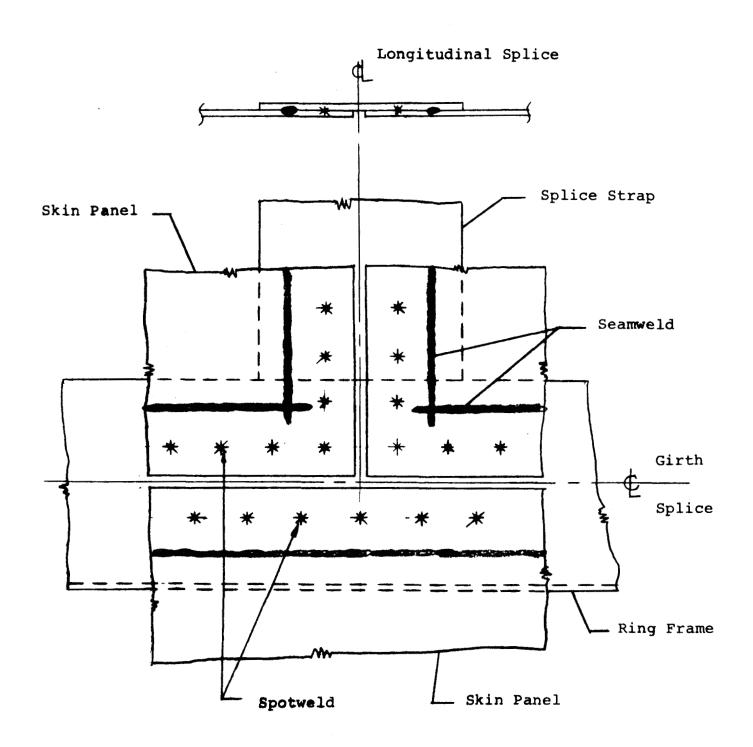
TYPICAL RESISTANCE WELD JOINT
